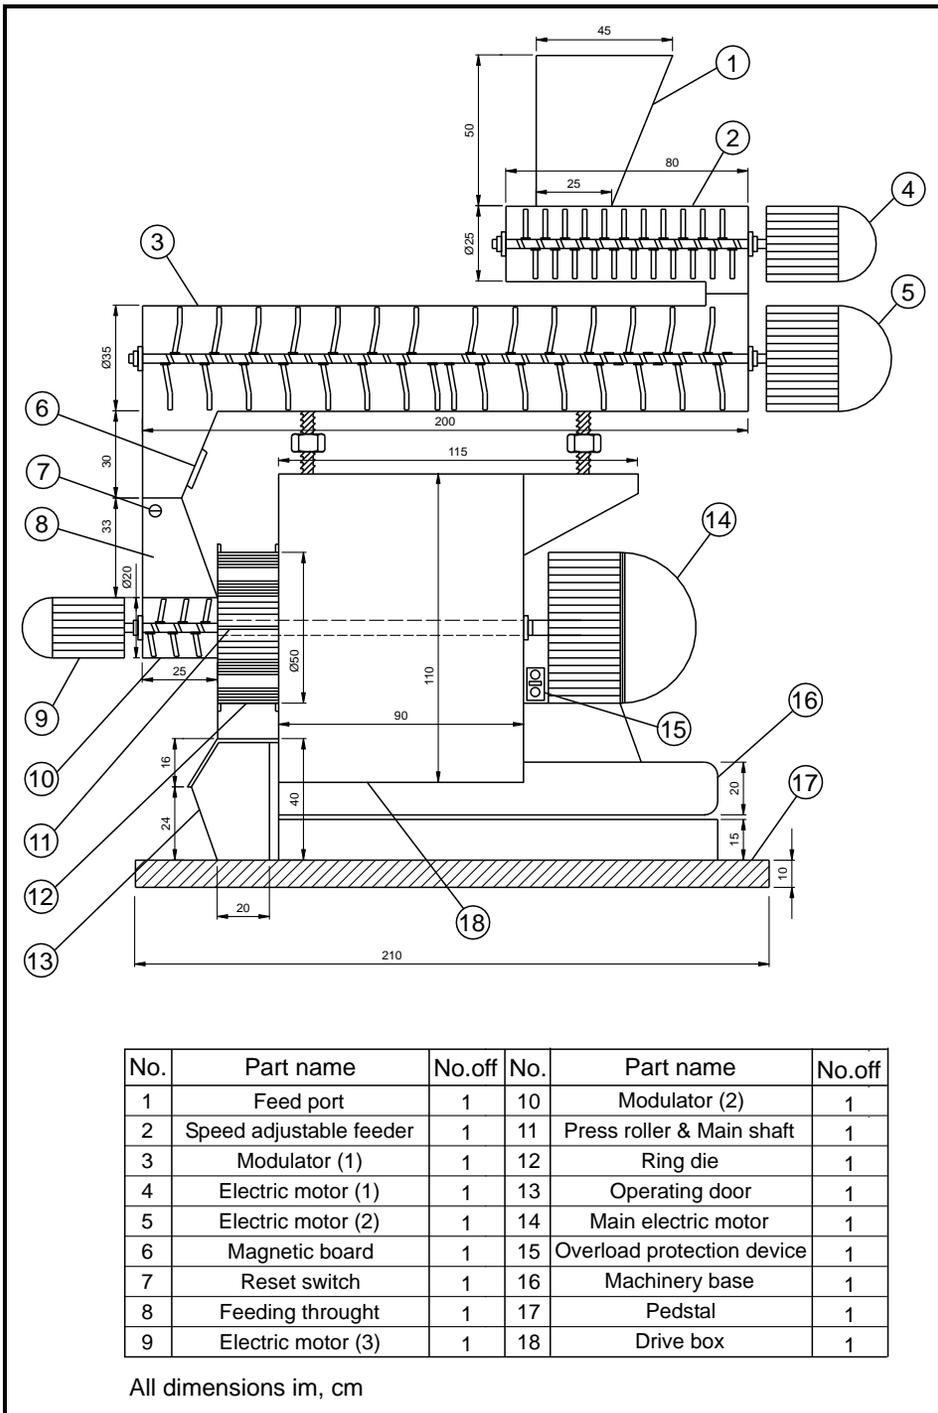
The schematic drawing of the ring die animal feed pellets extruder.
